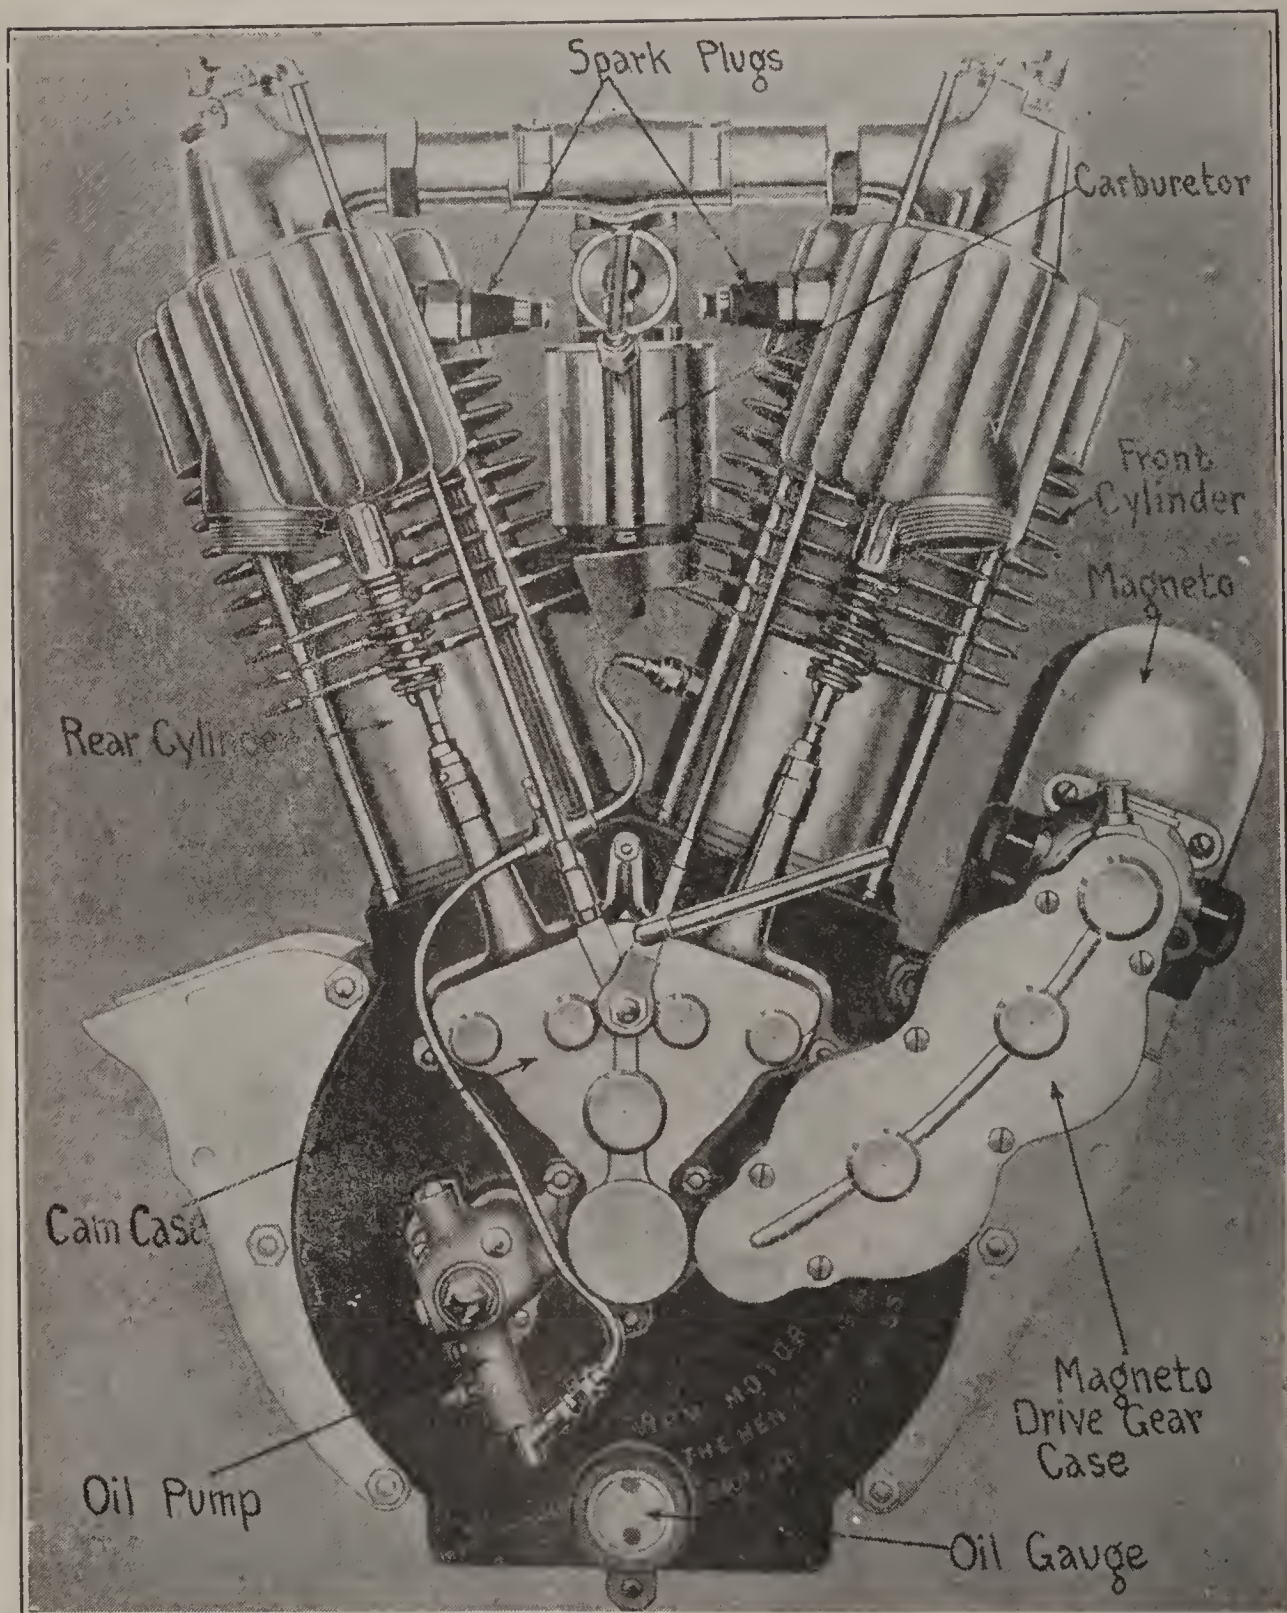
Complete Power Plant Assembly Employed on Two Cylinder Indian Motorcycle.
